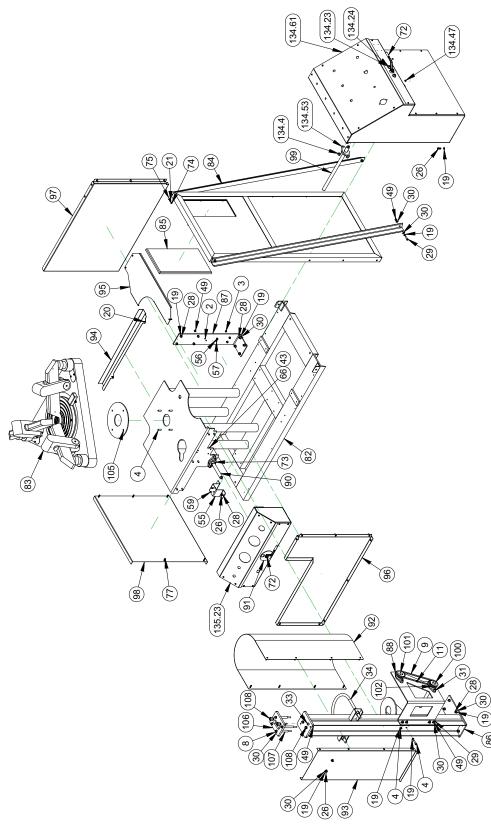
SRV-3K WITH VESSEL PLUMBING LABEL ASSEMBLY (P/N 88845)
